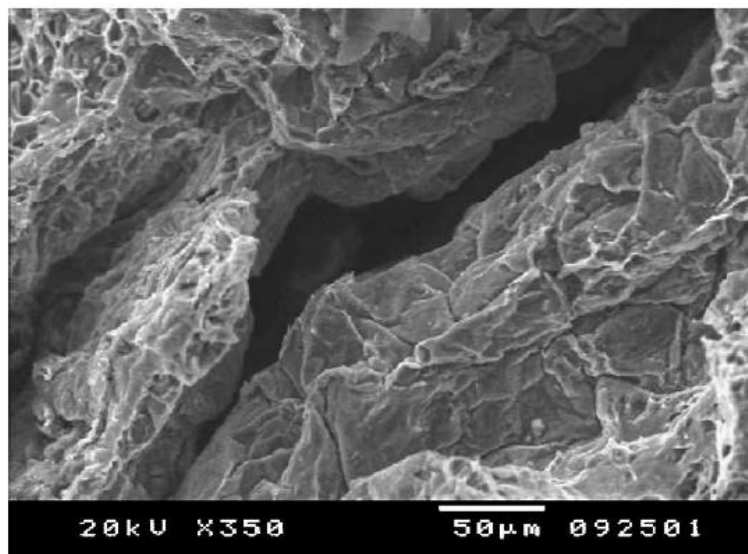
Fatigue crack initiating pore near surface of a 319 aluminum alloy casting [38].
